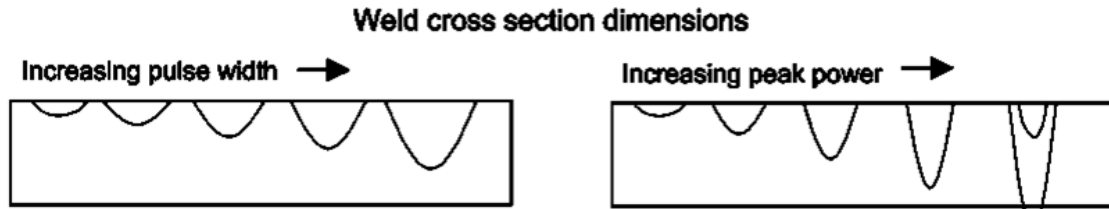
Effect on weld dimensions of increasing pulse width and peak power on weld dimensions [33].
